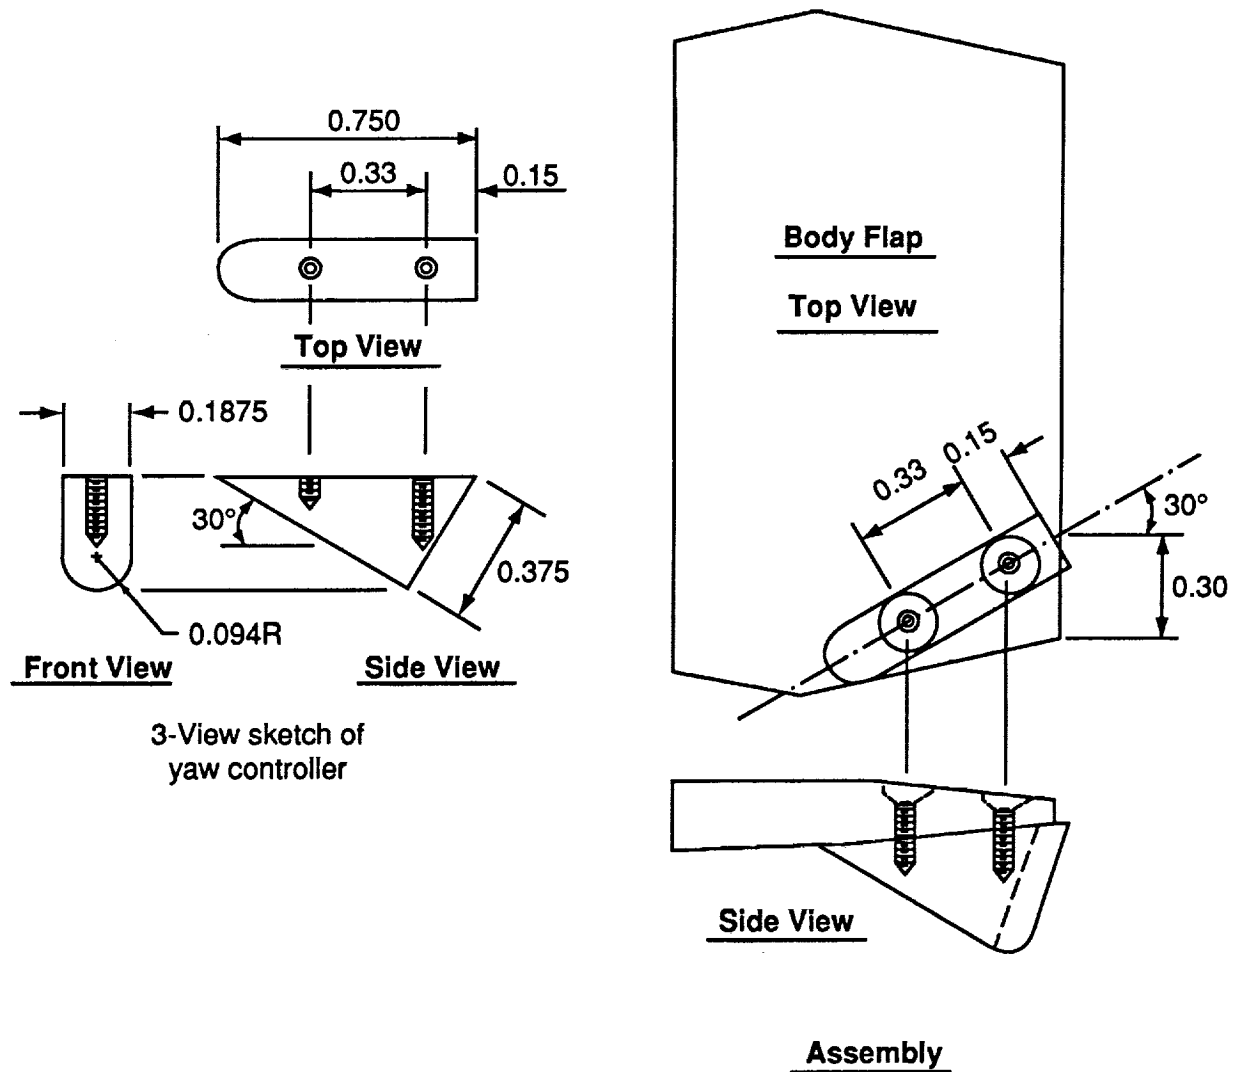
Sketch of yaw controller as built and tested, showing the pertinent dimensions and the arrangement when assembled. All dimensions are in inches.
